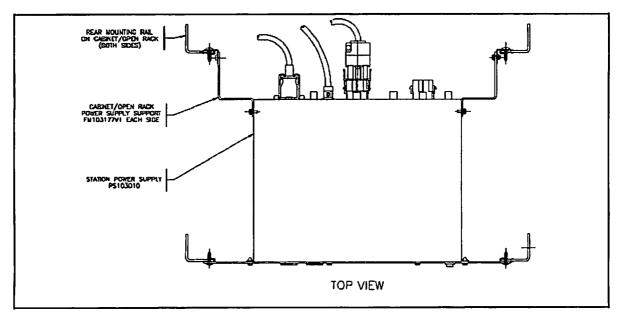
Mounting Bracket Configurations, 69/83" Indoor Cabinet and Open Rack
